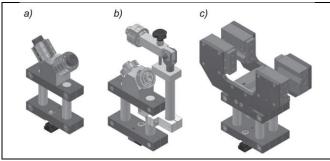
Supporting and feeding components: a) height-adjustable support, b) fixed-height support with a pressure-back, c) pneumatic feeder of the rod
